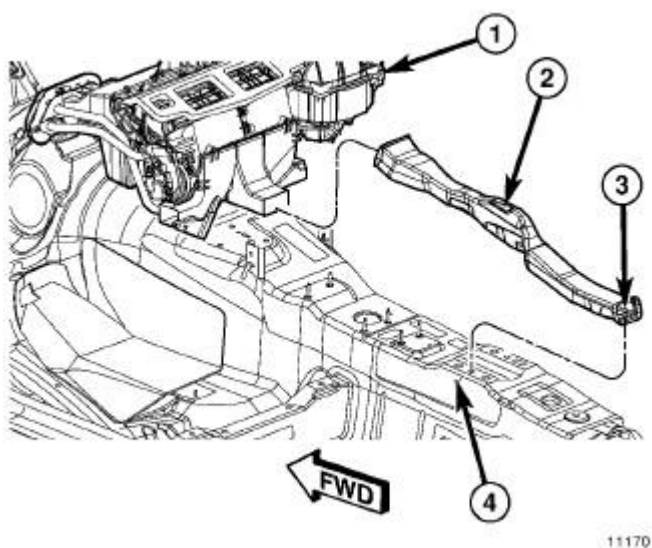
Identifying Floor Distribution Duct, Floor Console Duct, Retainer & Center Floor Panel
